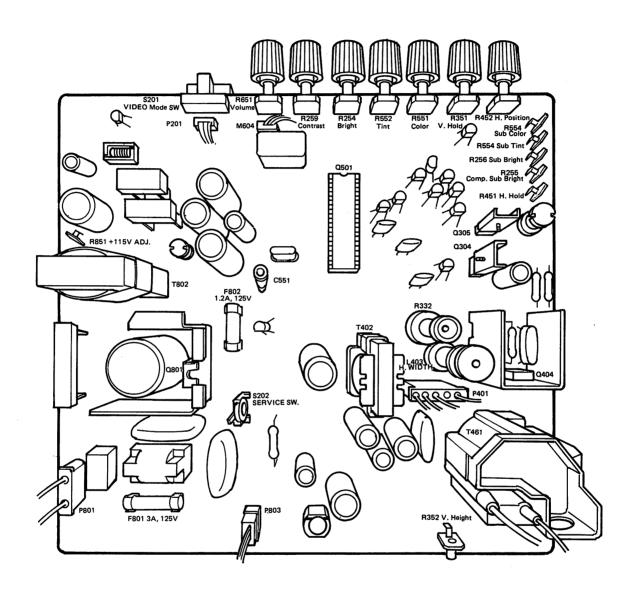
Mechanical Disassembly (Video Terminal Board)
